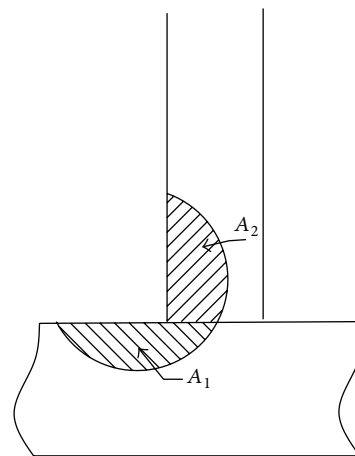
Cross-section of an ideal weld bead.
